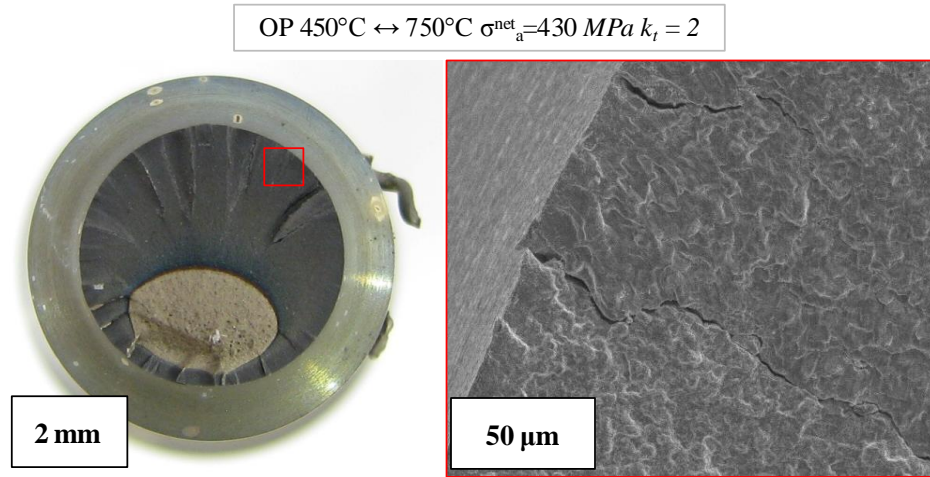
OP TMF fracture surface indicating an oxidized crack path and multiple sources of crack initiation at the notch root surface.
